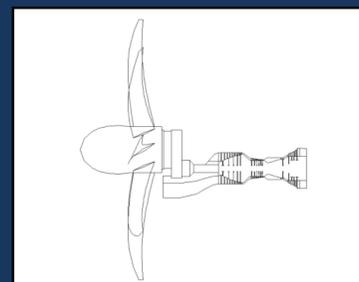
3-shaft turboprop (similar to TP400 engine)
